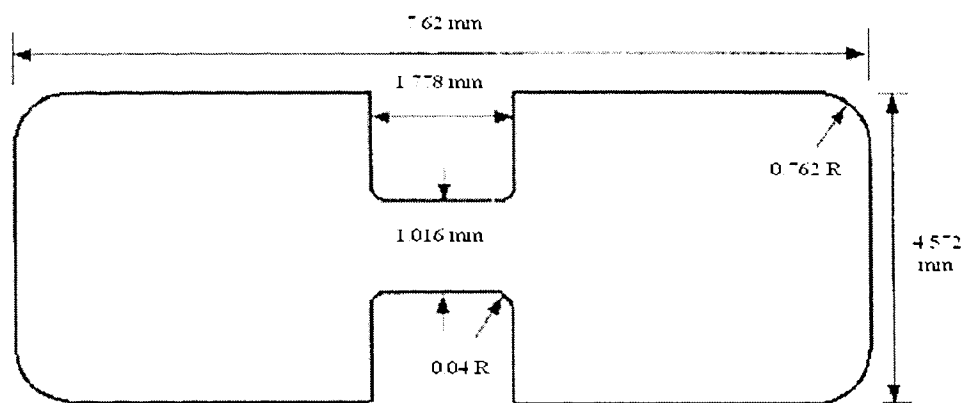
Dimensions of mini-tensile sample used for mechanical testing.
